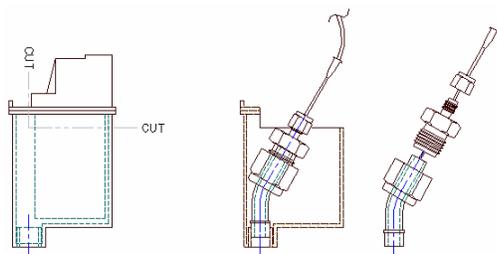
Left: Side View, cut lines on printer ink cartridge. Right: Side View, section and assembly of modified ink cartridge.
